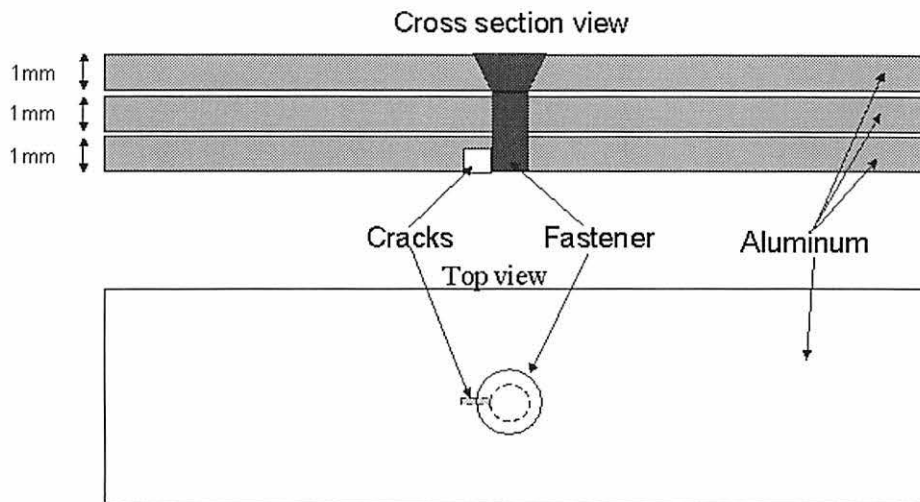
Cracks under fasteners in multi-layer structures
